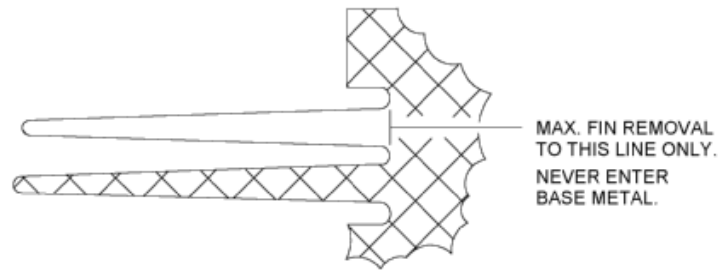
• Cooling Fin Removal Maximum
